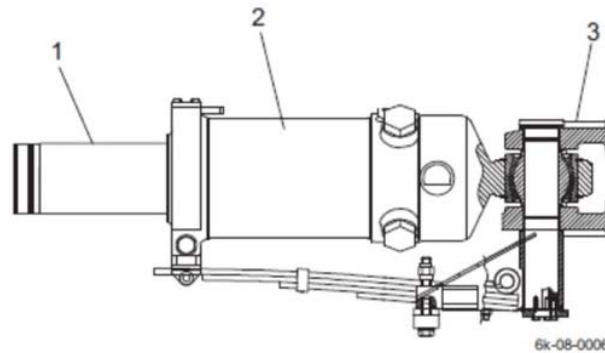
F-End Automatic Coupler: 1) Drawbar; 2) Buffer tube
